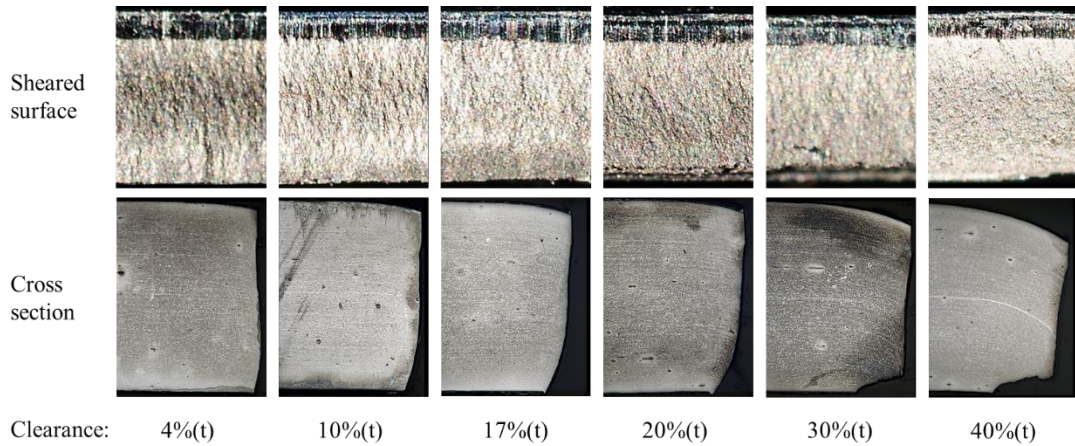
The surface and cross-section of trimmed DP980-2 sheet material for different trimming clearances.
